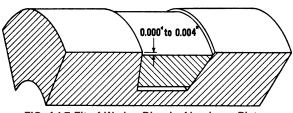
Fit of Wedge Ring in Aluminum Piston
